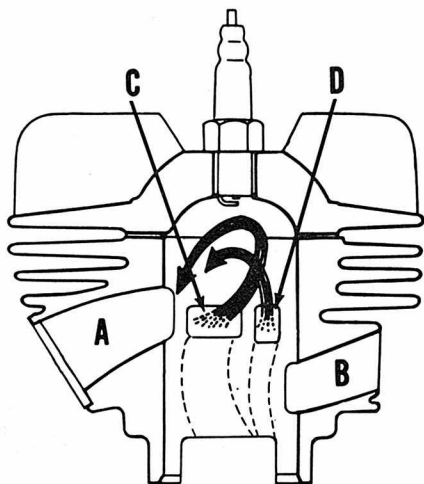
Basic port pattern of cylinder may be seen in this drawing.
